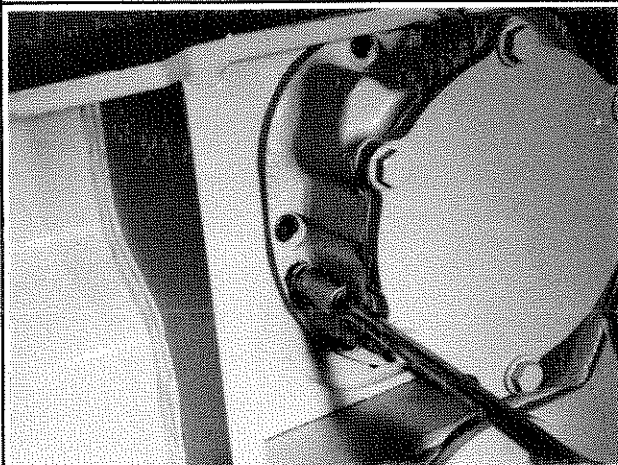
DISASSEMBLY OF PTO ASSEMBLY FOR CAT D3, HD6, AND MF D400C (Sheet 4 of 4)
